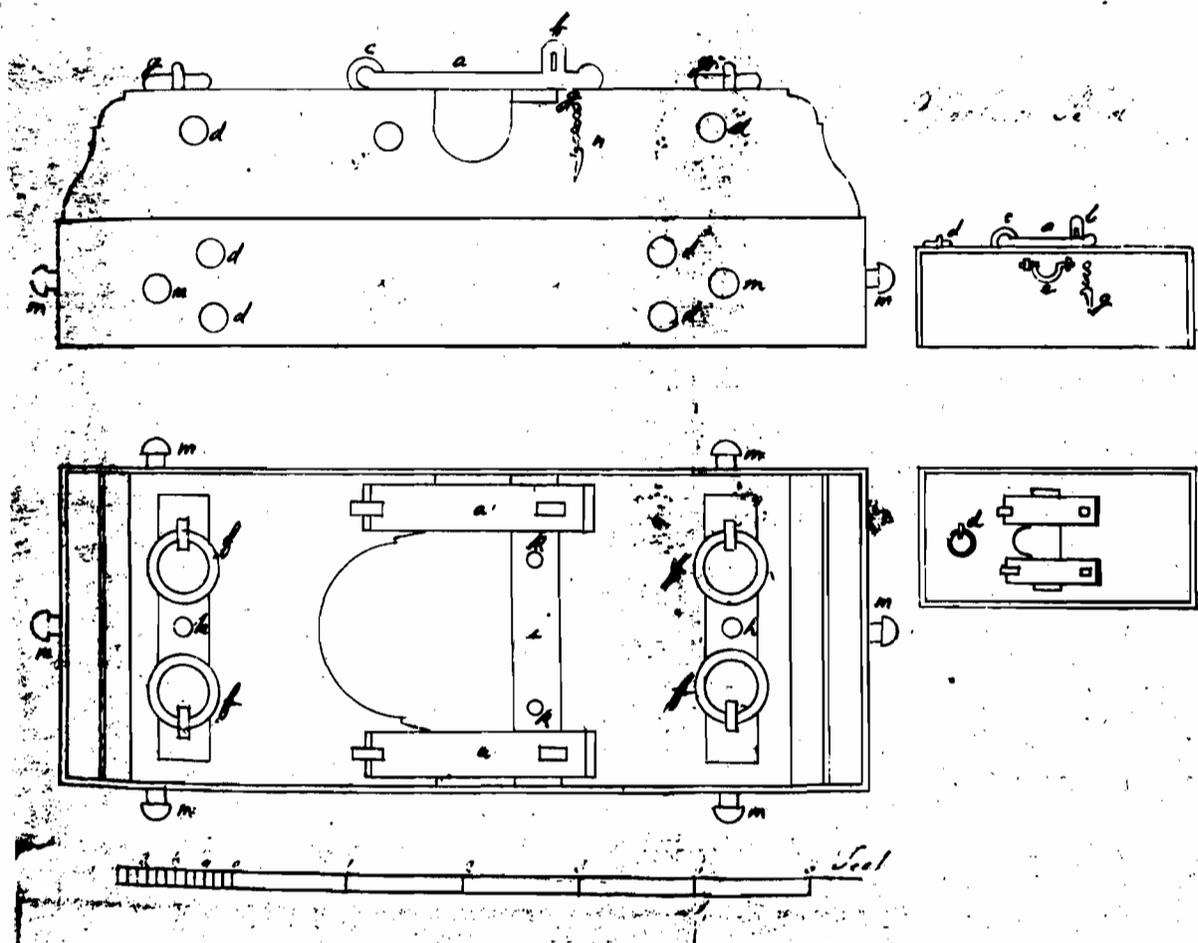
Plan and Elevation of the Beds for a 13-inch and a Coehorn Mortar. (The Royal Artillery Institution, Woolwich, U.K. Adye (1766), Plate 9.)
